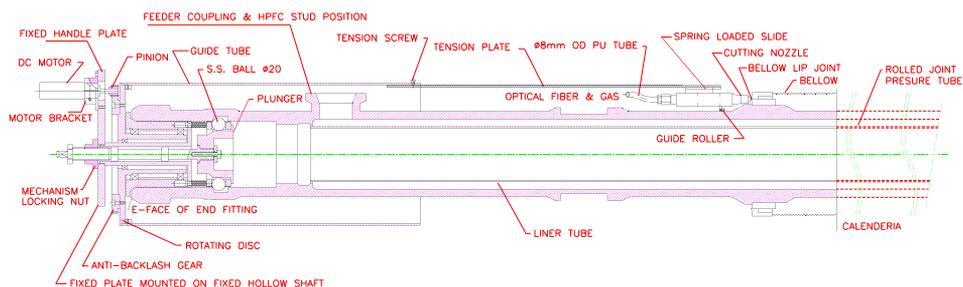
A sketch of the bellow lip cutting fixture mounted on the E-face of the coolant channel.
